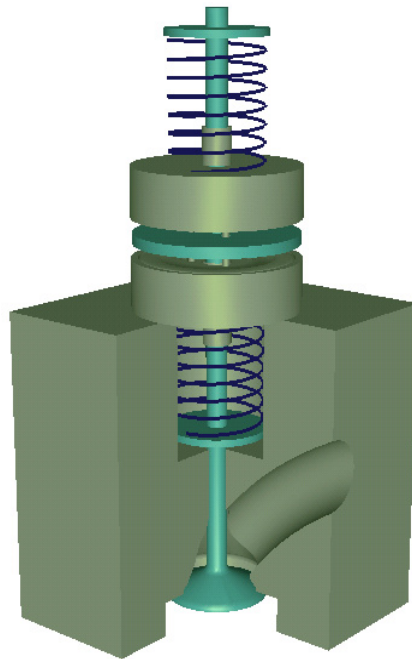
Electromagnetic drive of the valve gear of the internal combustion engine
